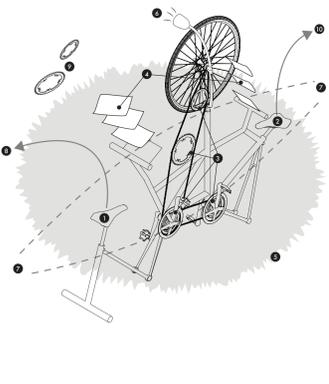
TECHNICAL DRAWING OF ENQUIRY MACHINE 1: INTERVIEW MACHINE. IMAGE BY THE AUTHORS
